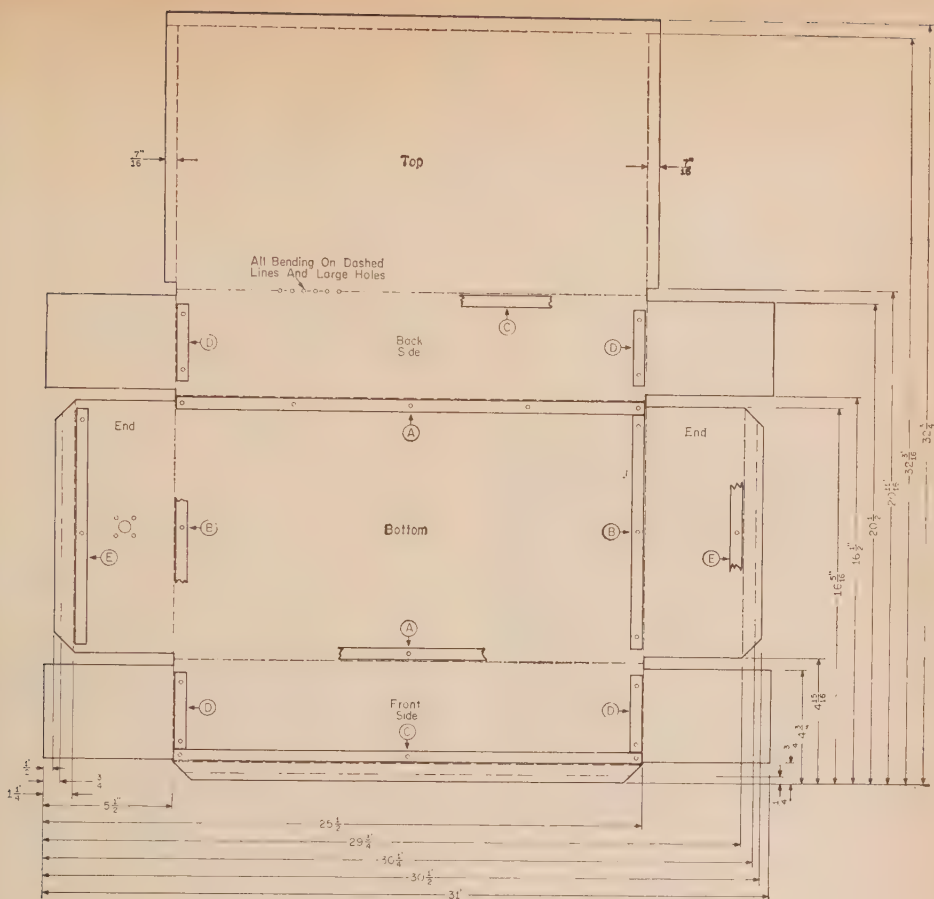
Template for cutting perforated aluminum sheet to be folded into cage for the resistors.
